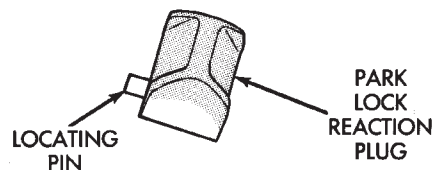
Reaction Plug Locating Pin And Snap-Ring
